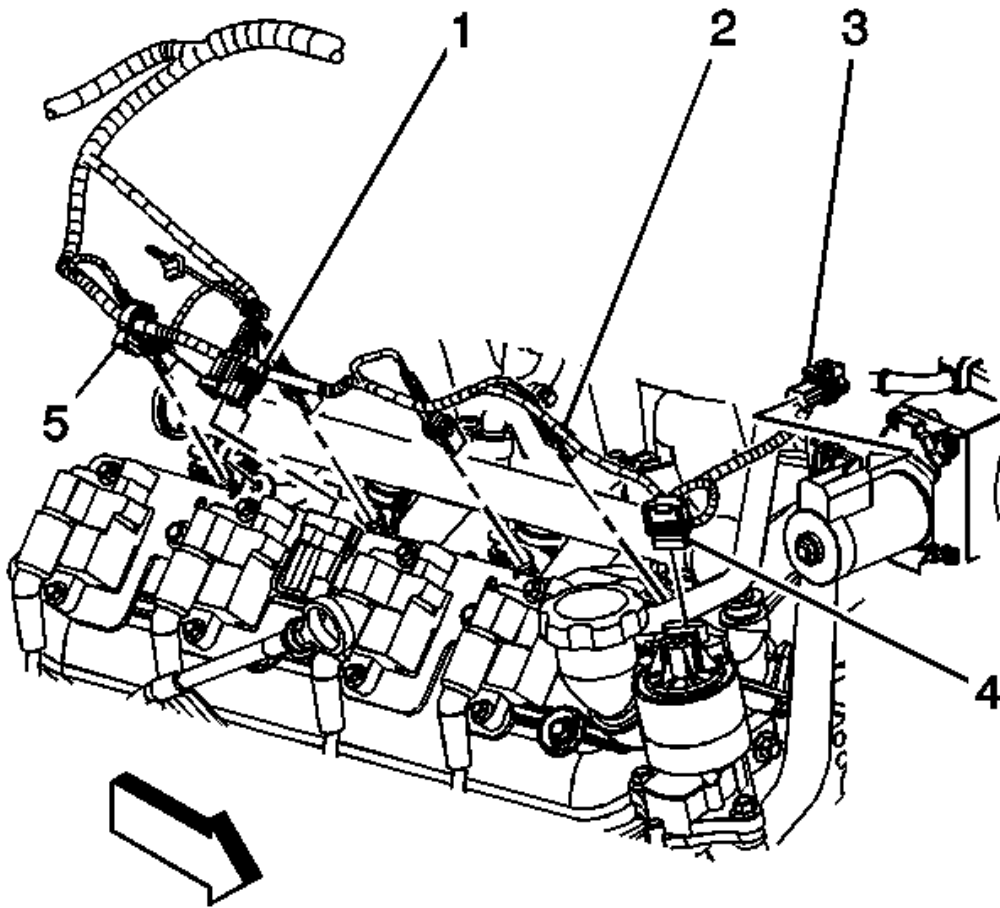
Main Ignition Coil Wire Harness Connector & Clips
